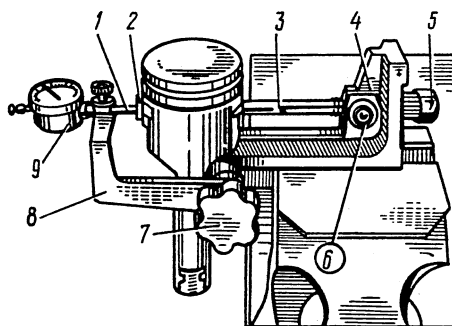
Assembled Piston-Pin-Connecting-Rod Group Installed on Tester A.95615 for Pin Pressing-Out Test:
